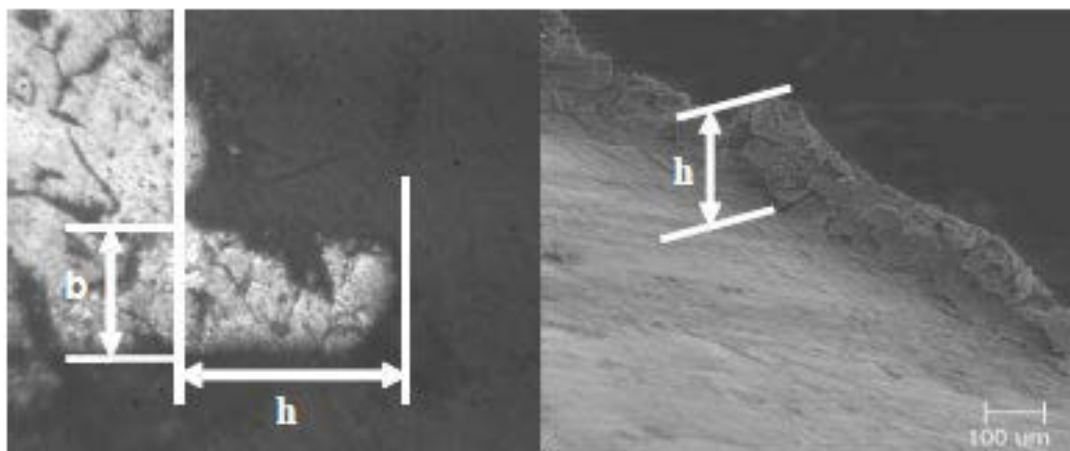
(a) Bottom view of the burr formed during test 16 at region 1 (Mag. 20X); (b) Bottom view of the burr formed during test 16 at region 2 (Mag. 15X).
